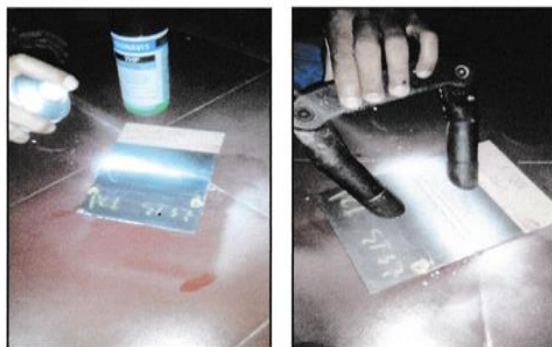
Inspection of weld defects by Dye Penetrant Testing method, Material ST 37 oil cooling medium
